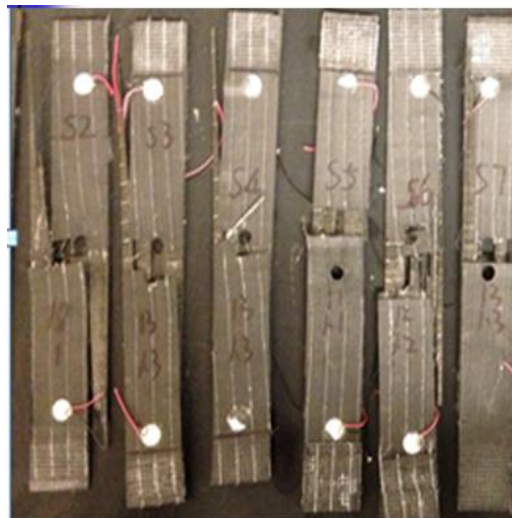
The Final Failure Pattern for Open-Hole Specimens
